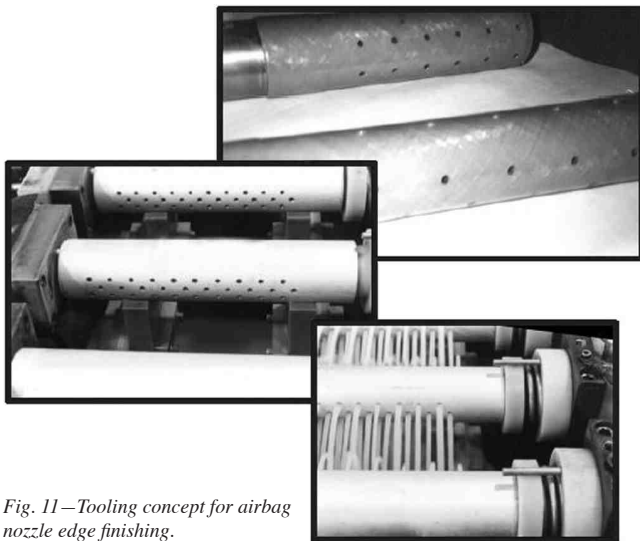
Tooling concept for airbag nozzle edge finishing.
